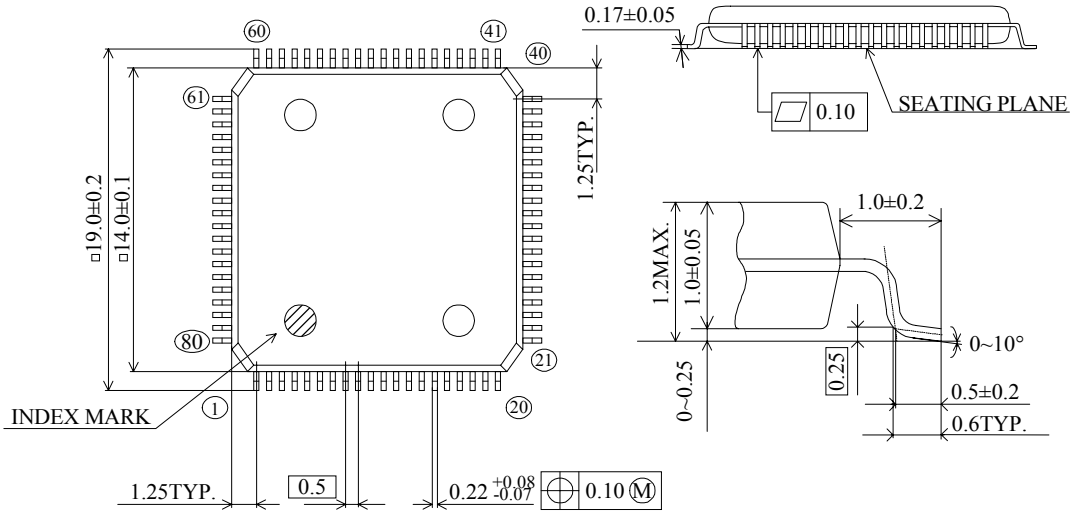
80-Pin QFP:TB Package Dimension Diagram
